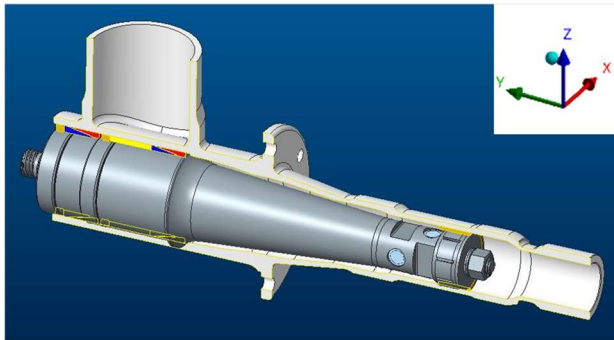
CAD representation of the load sensor mounted in the wheel axle with the reference system.
